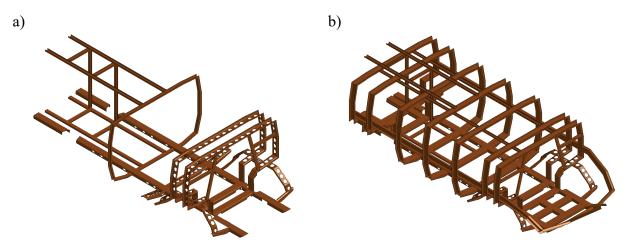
System of the internal space frame improving the supporting structure stiffness a) before modification, b) after modification
